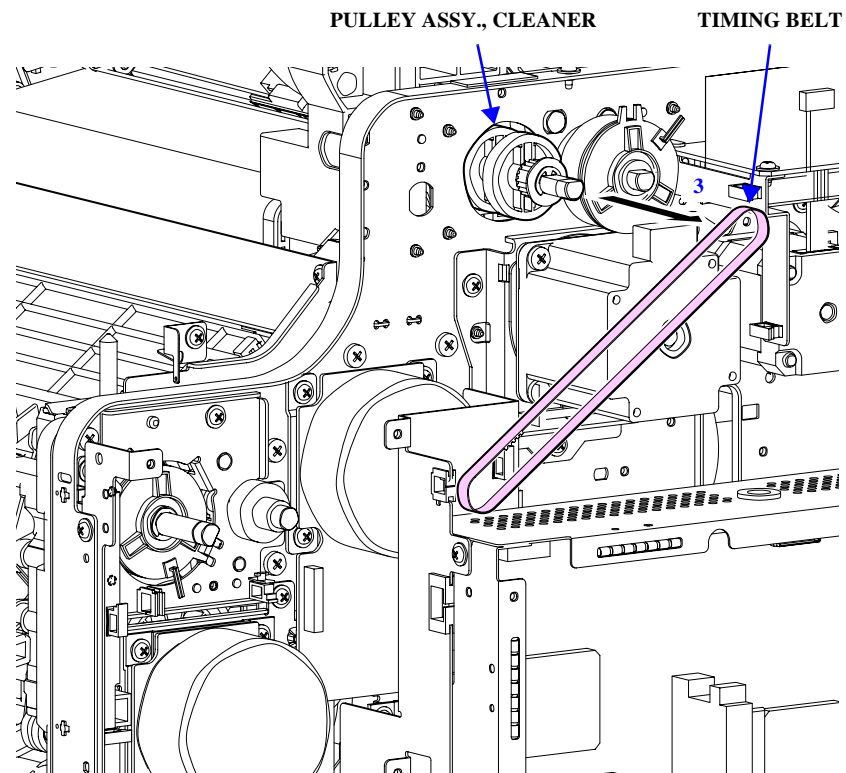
Removal of PULLEY ASSY., DRIVE
